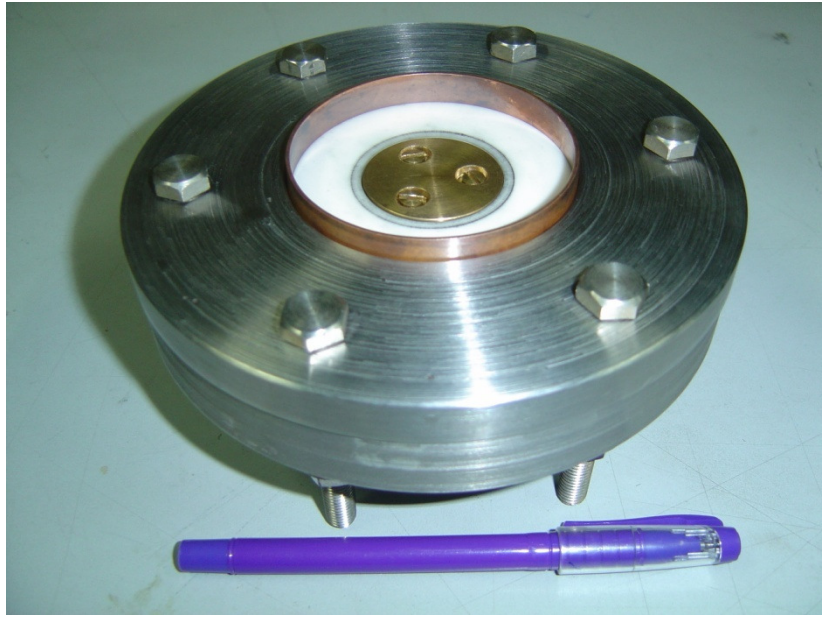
Top View of assembled fixture with test piece for helium leak detection
